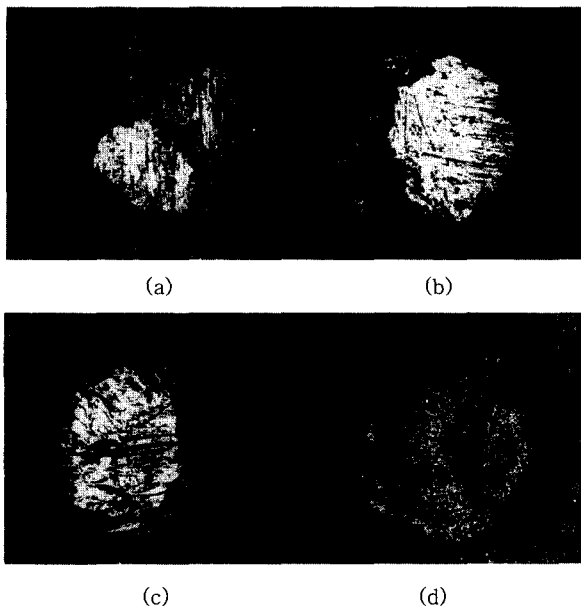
The fracture surface of solder ball joints with plated layer (a)Cu, (b)Cu/Sn, (c)Cu/Ni, (d) Cu/Ni/Au (solder : Sn-3.5Ag-0.7Cu, soldering condition : 250°C, 0.6m/min)
